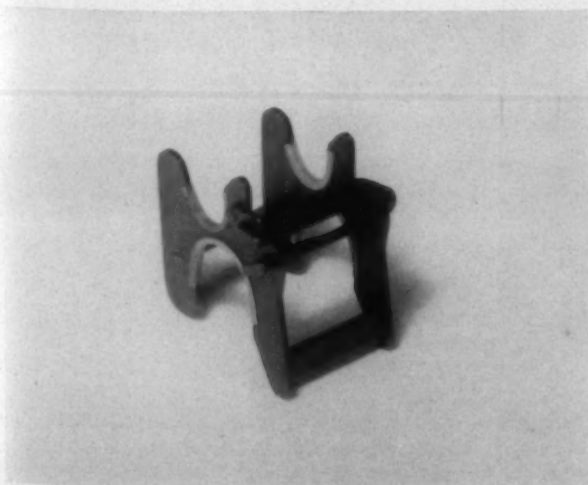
Dixon Casablancas cradle with nylon bearing surface.
